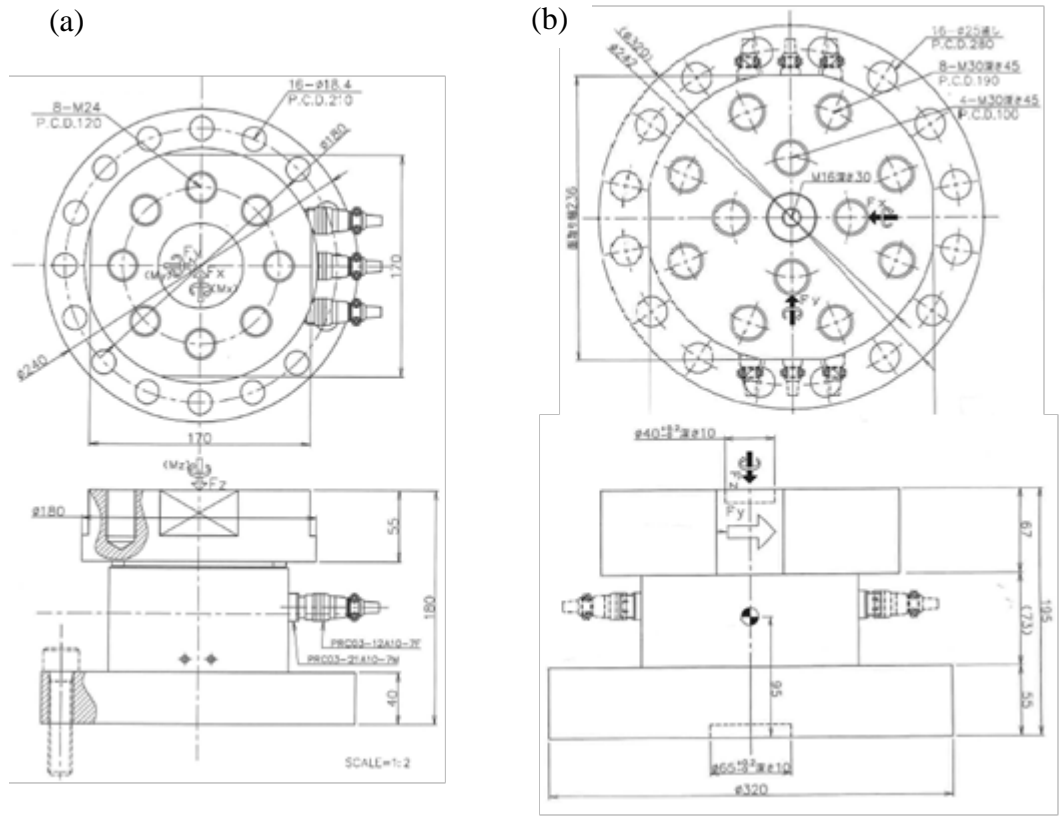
Load cell drawings with bolt patterns and elevation views: (a) Type A and (b) Type B
